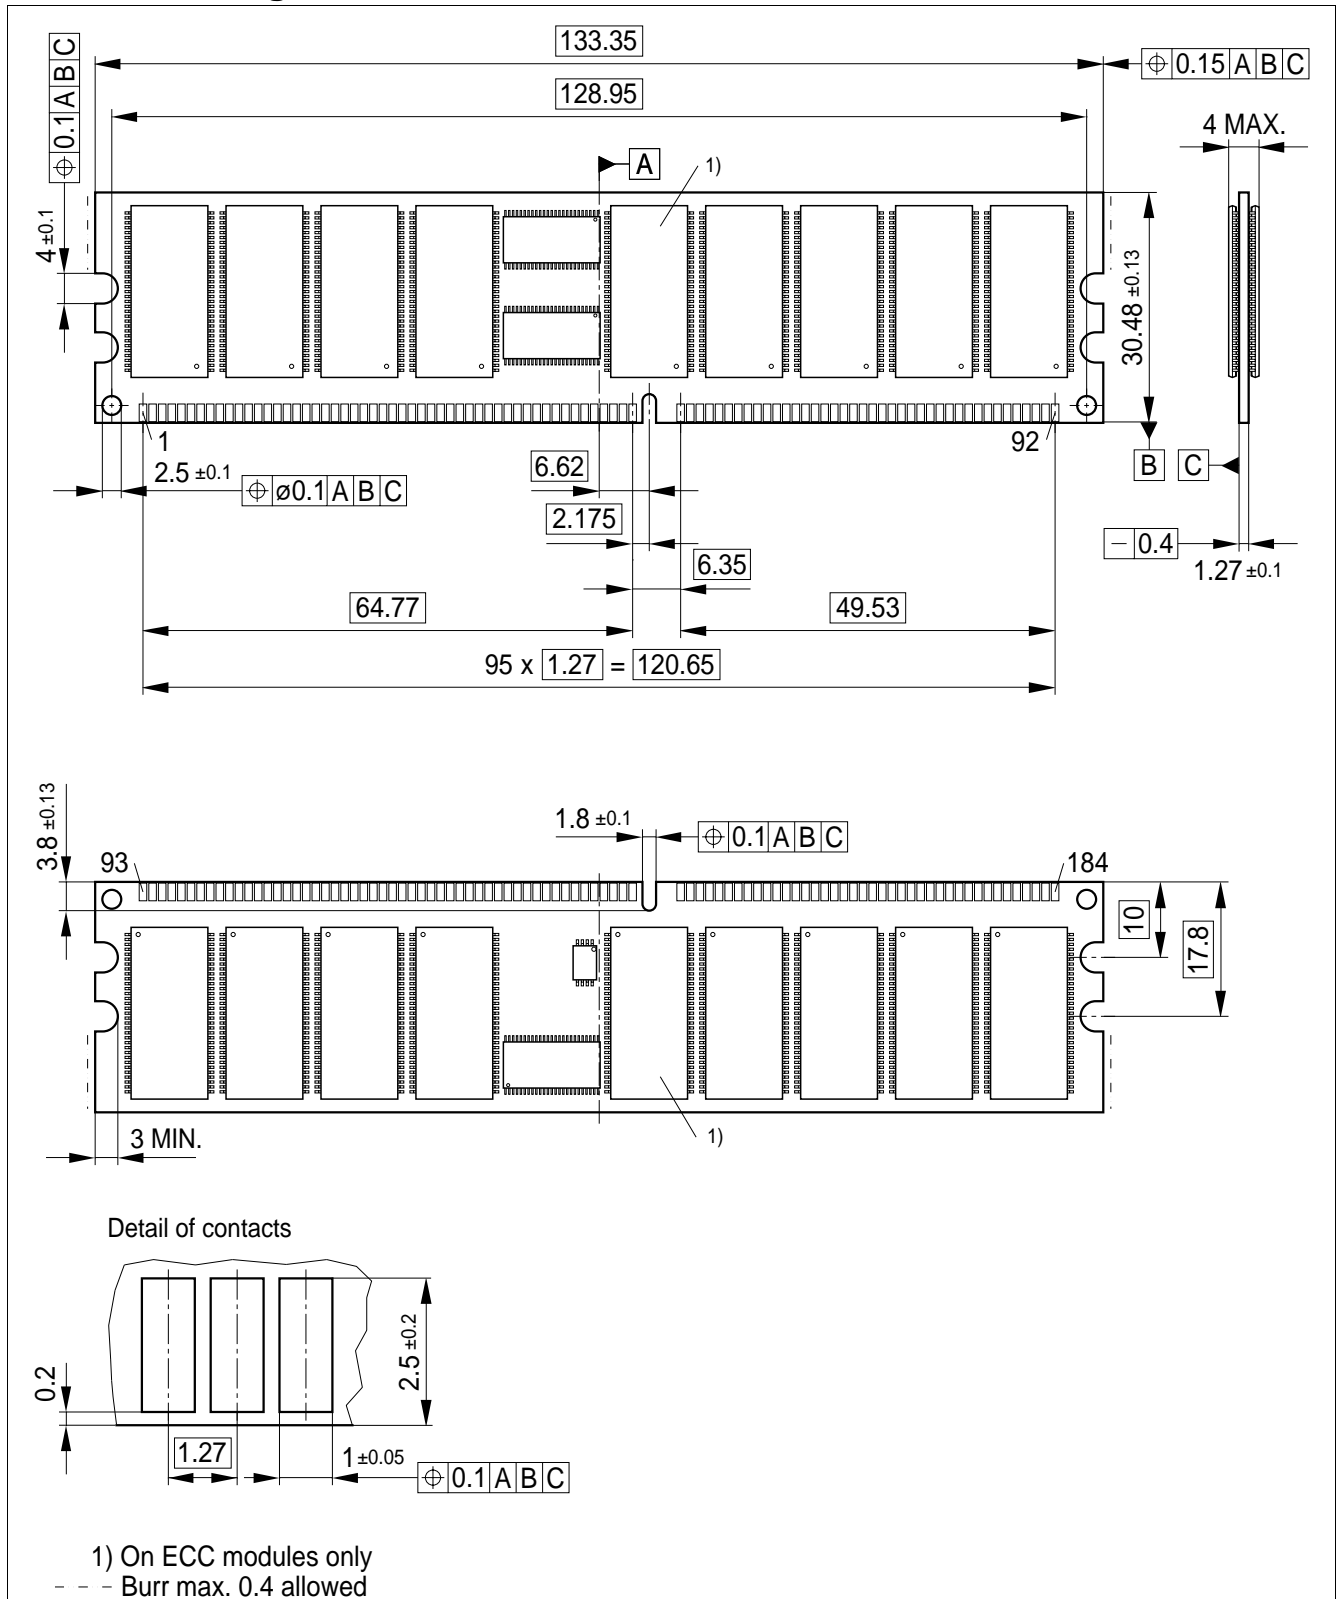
Package Outline RDIMM Raw Card (L-DIM-184-12-3)
